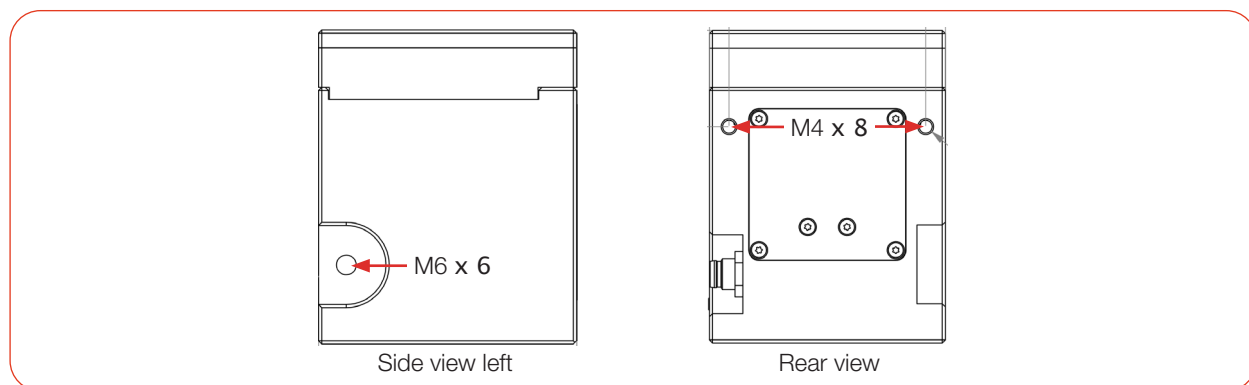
Mounting threads in the housing (dimensions in mm)
